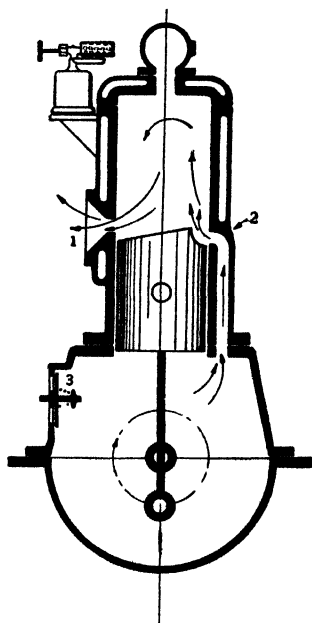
Diagrammatic Arrangement of 2-Cycle, Surface Ignition Oil Engine
